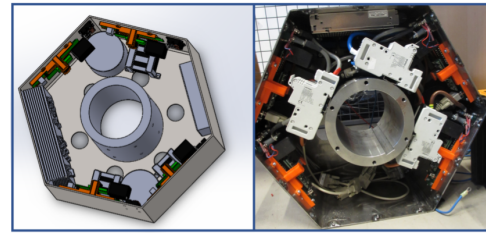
Example of enclosure box with RPE, measurements and wireless controller [43] (Courtesy of Uppsala University). Left: CAD-drawing. Right: Final assembly.
